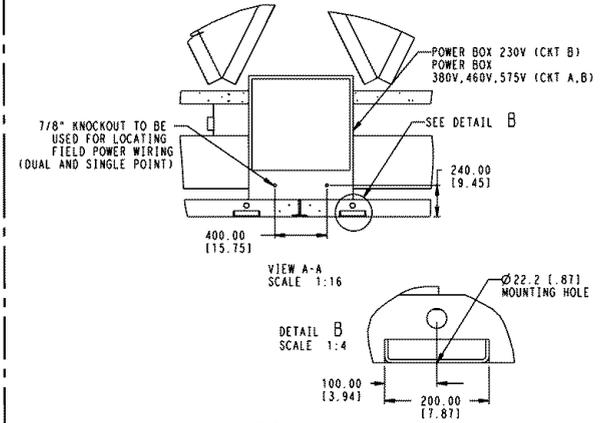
30RB160, 170, 315A/B, 330A/B, 345A/B, 360B Air-Cooled Chiller Dimensions
